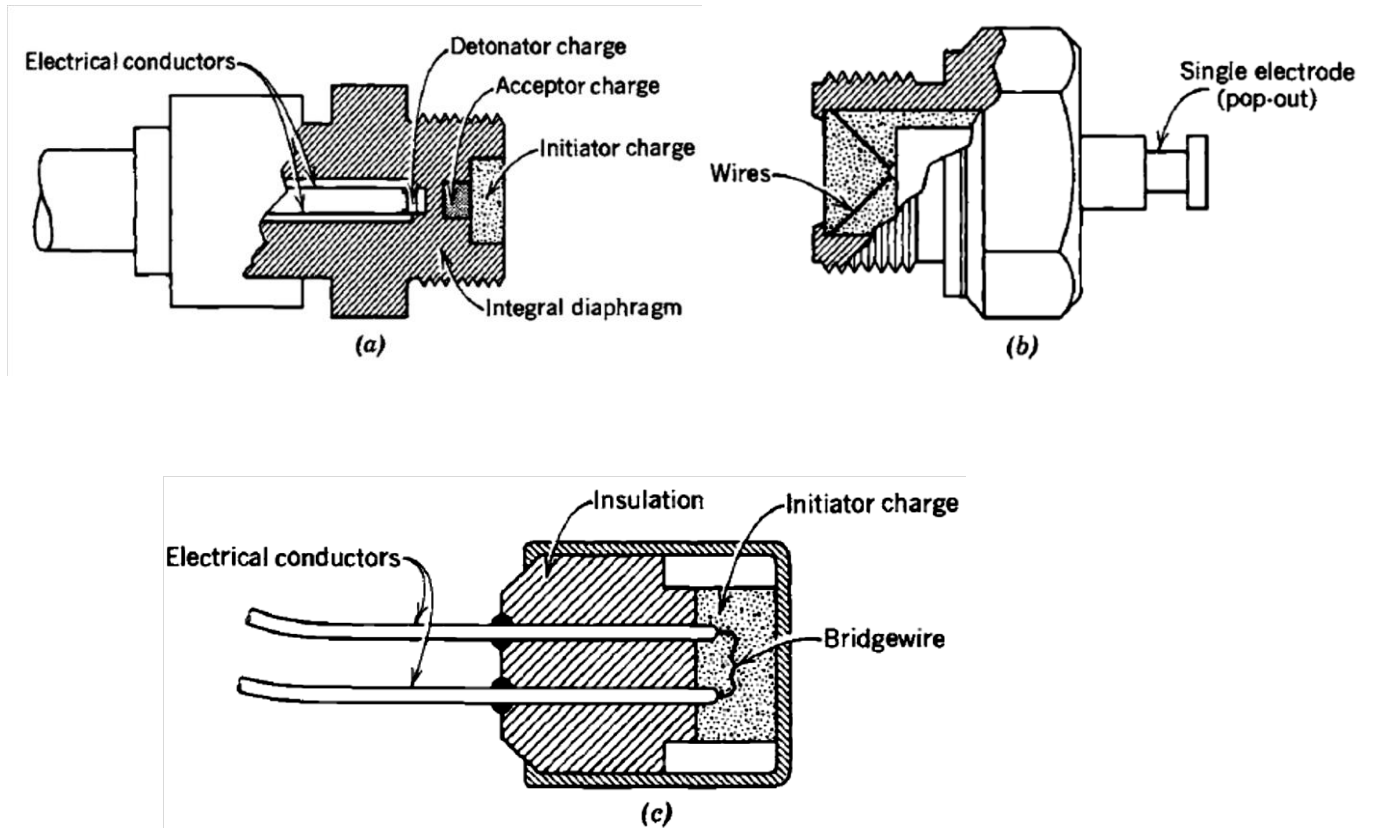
Typical electric initiators; (a) integral diaphragm type; (b) header type with double bridgewire; (c) exploding bridgewire type.
